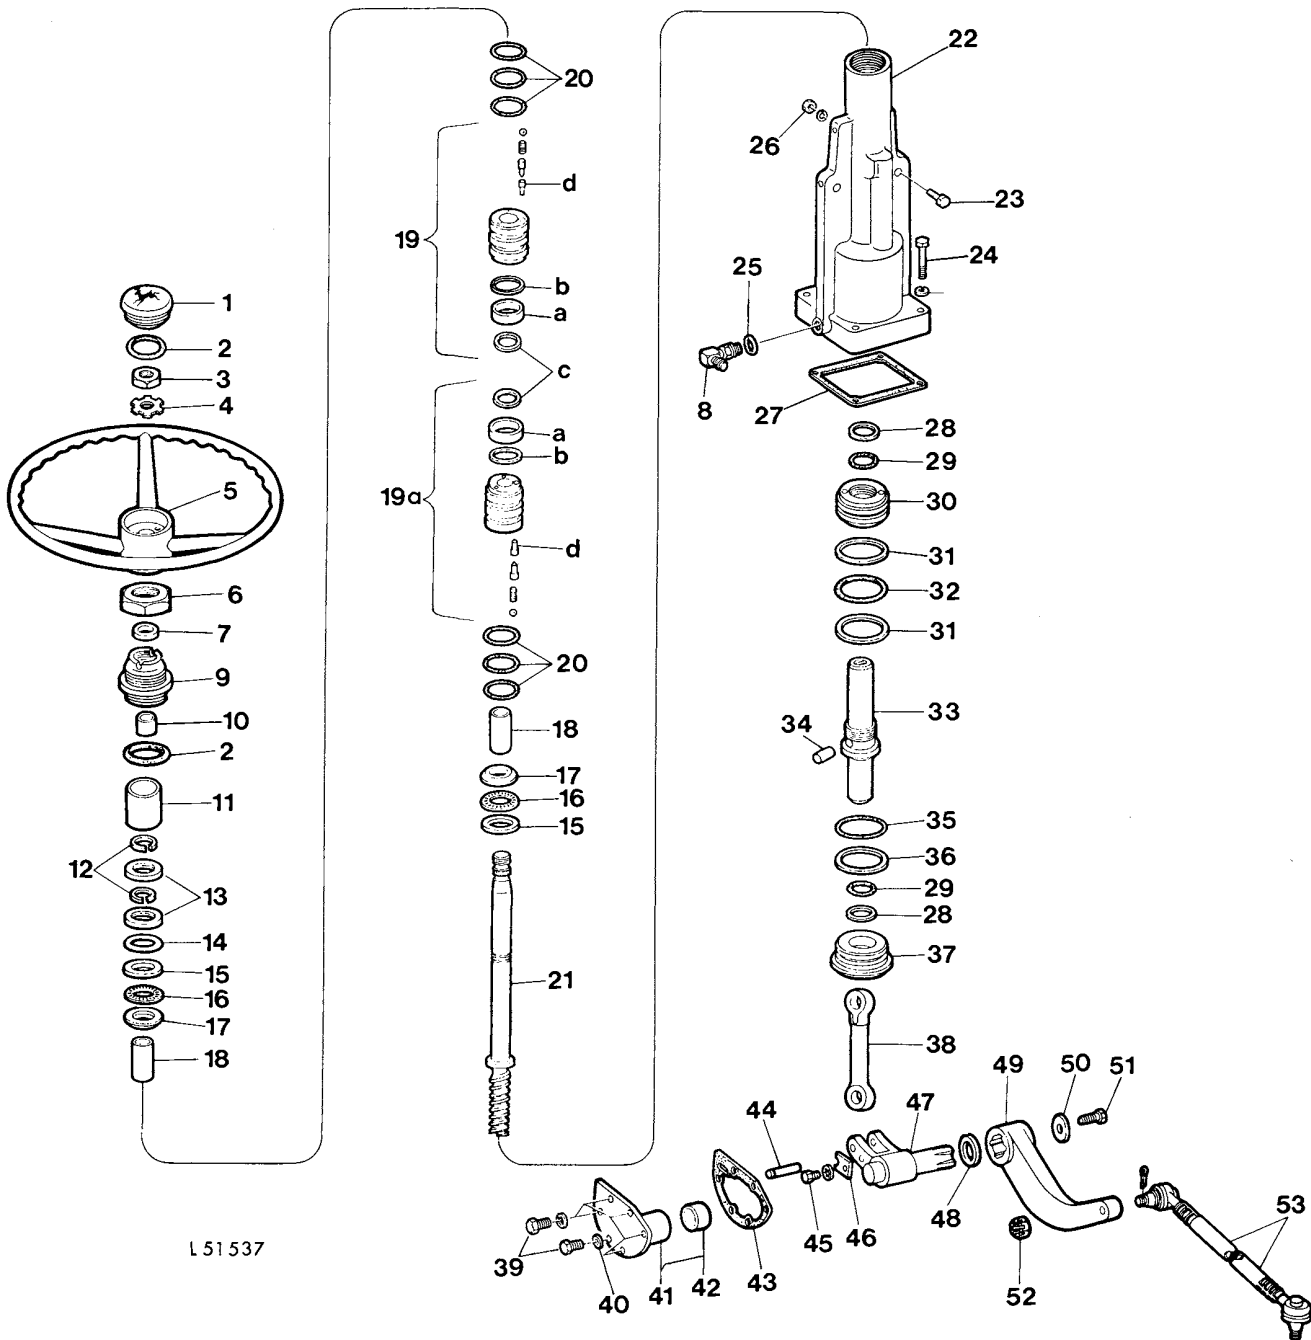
Steering Wheel Shaft and Valve Housing Assemblies
